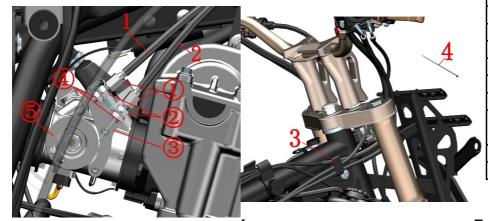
FRONT FORK COMPONENT		Replace the throttle line	CHK	( <b>0</b> )
